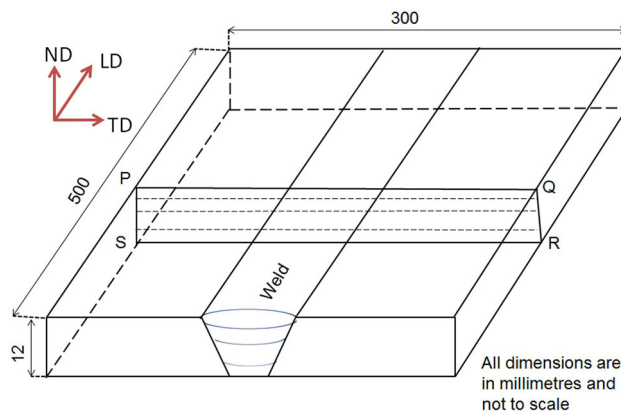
Schematic diagram of the multi-pass welded plate showing lines of measurement
